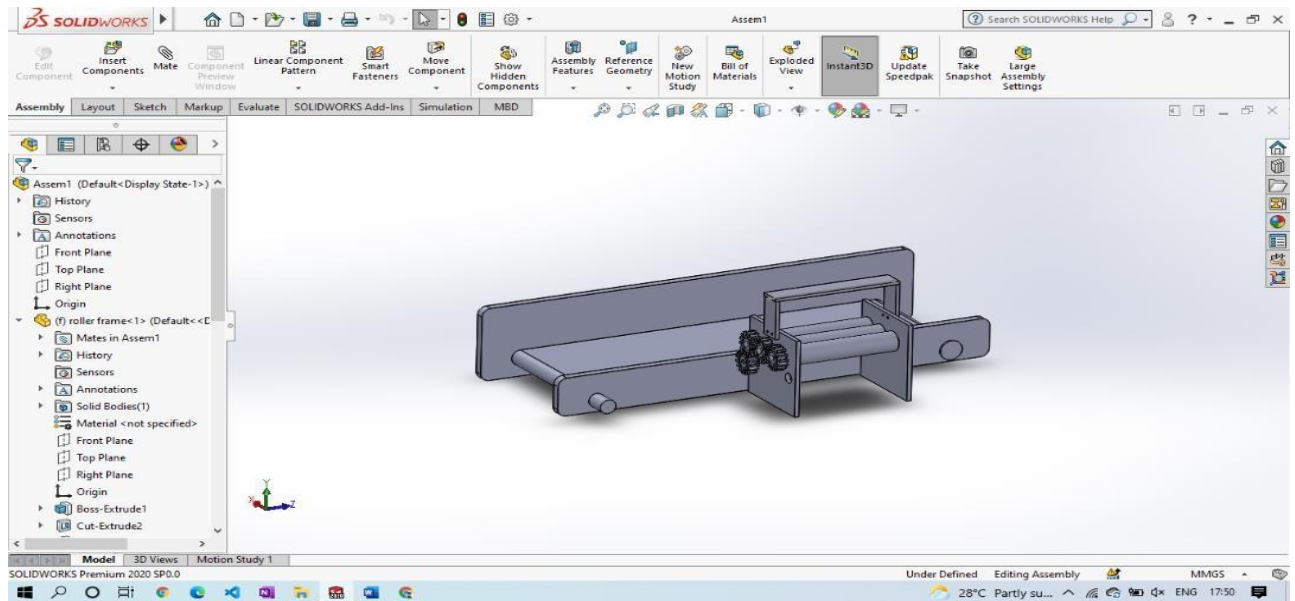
Isometric view of automatic Capsicum sorting machine.
